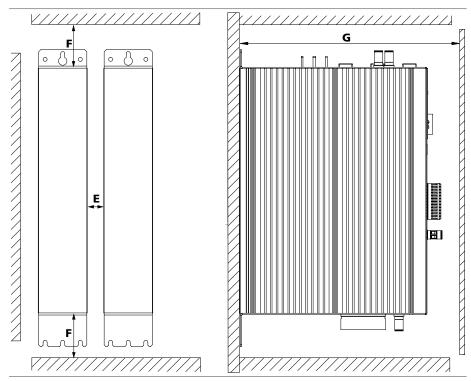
Mounting clearances for air cooling, schematic depiction for BG1 to BG6a
